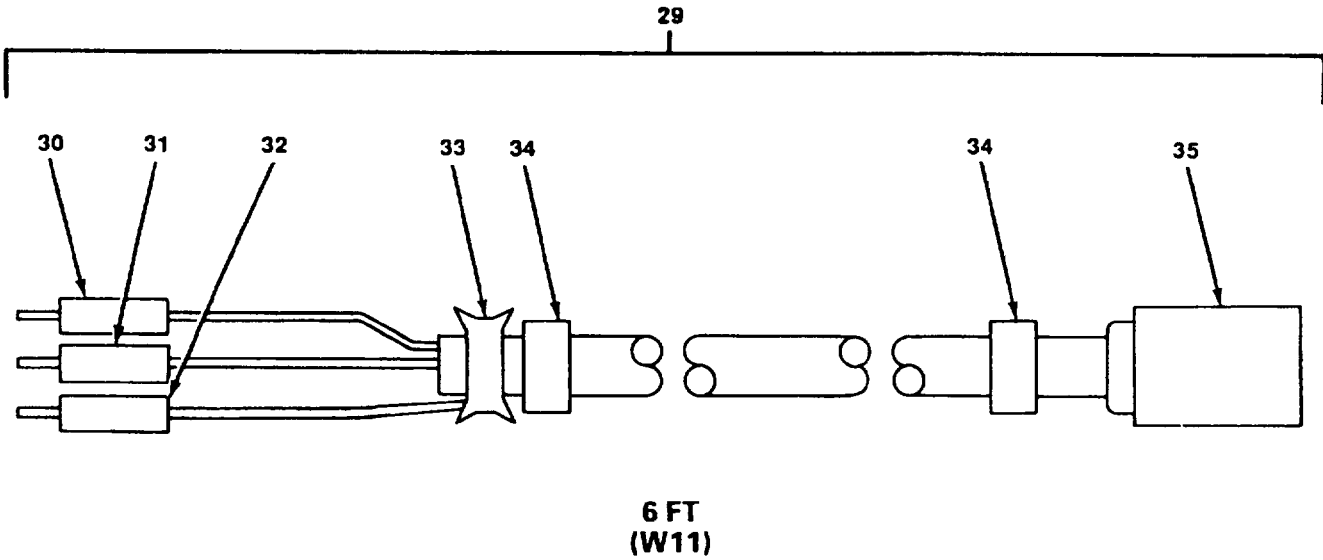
Cable Assemblies W7 through W12 (Sheet 3 of 3).
